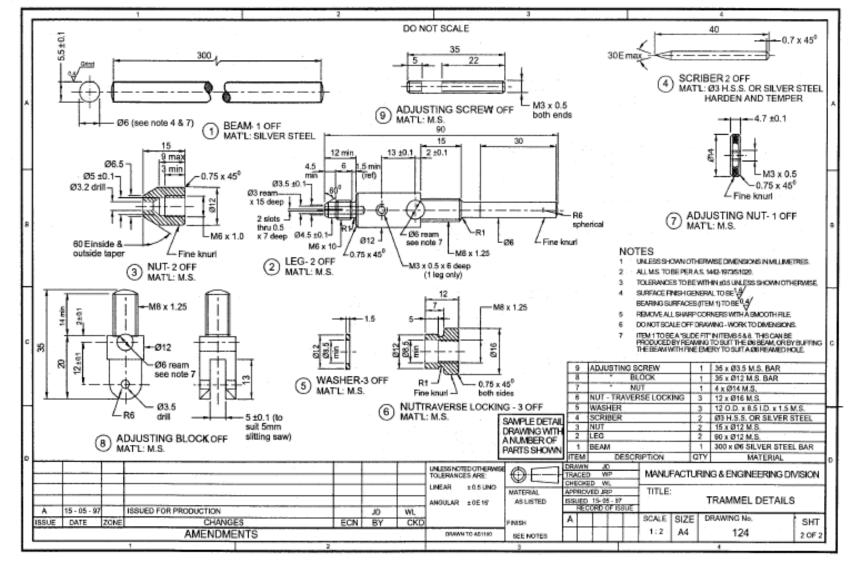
Example of a Detail Drawing (Details of parts required for assembly of Fig. PF-4-1-11)
